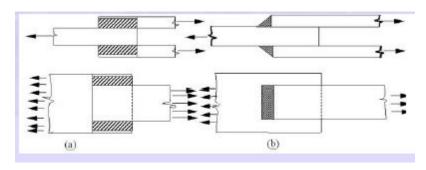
Fillet (a) side welds and (b) end welds
